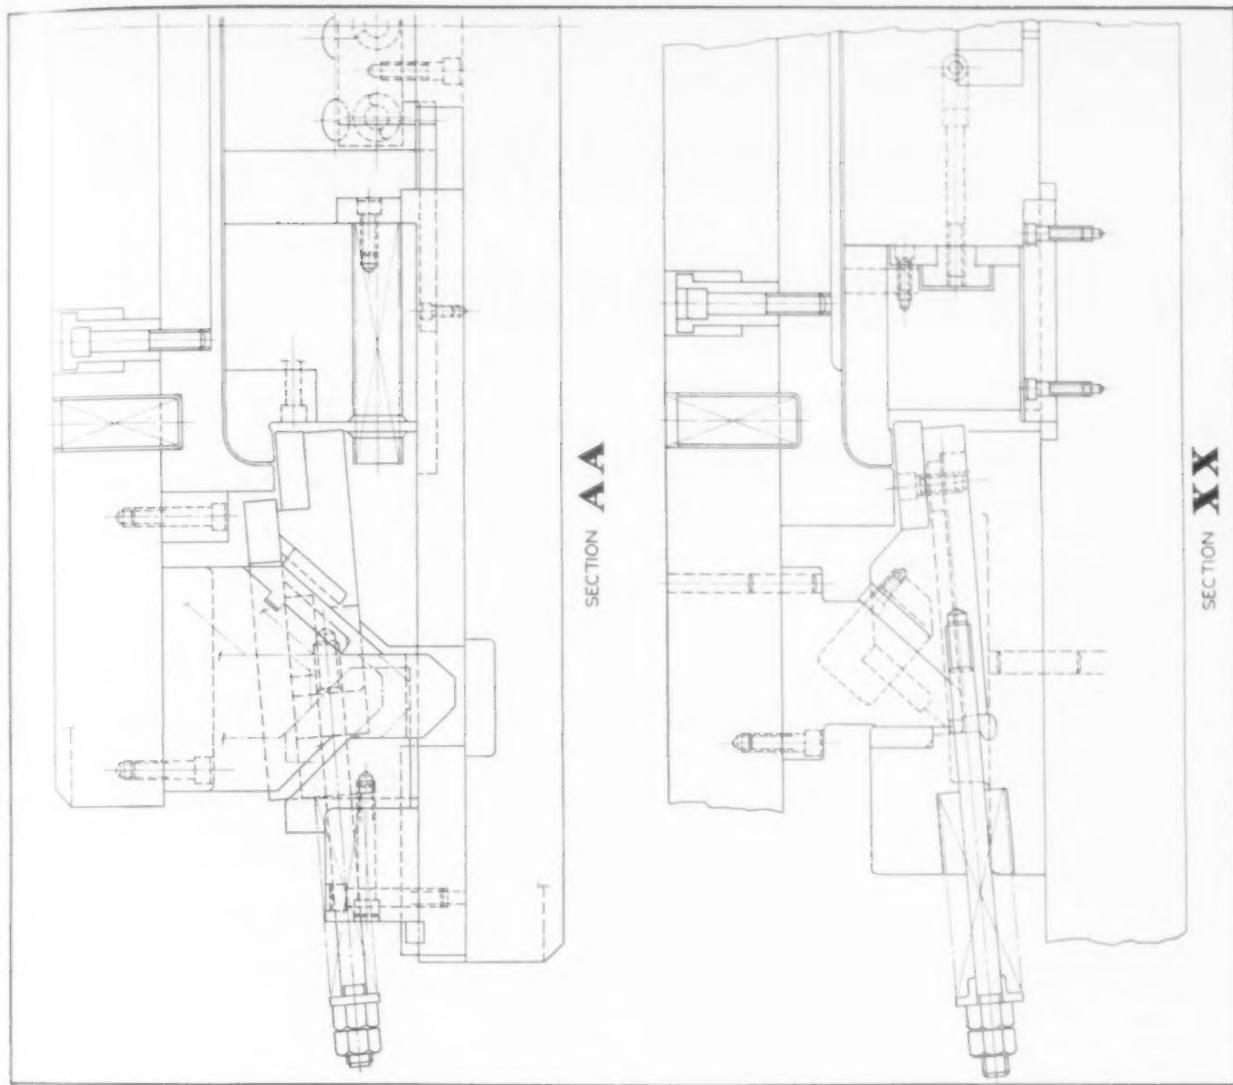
This partial view of the cam flange die shows sections A-A and X-X.
